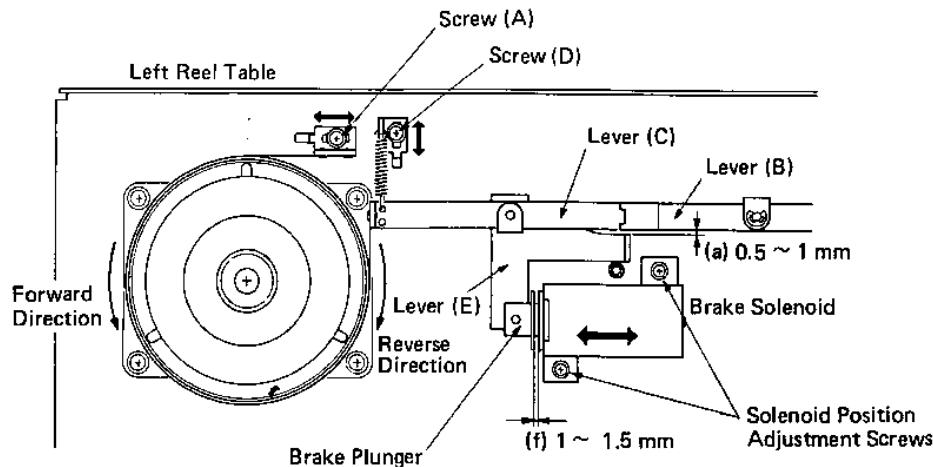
BRAKE MECHANISM & TORQUE ADJUSTMENTS
